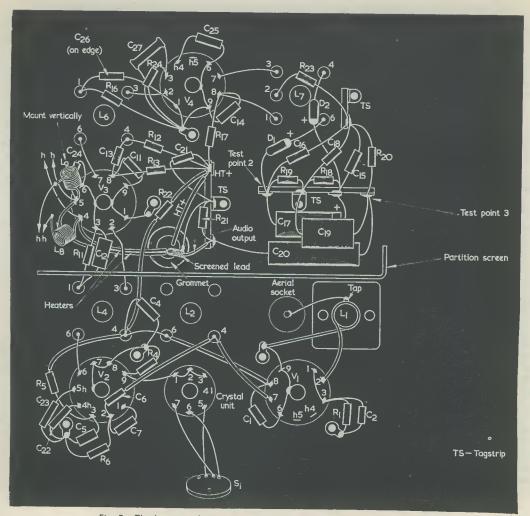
The layout and wiring below the chassis. The heater, h.t. supply and audio output leads pass through the grommet to the top of the chassis. The heater wiring should conform to the circuit of Fig. 2
